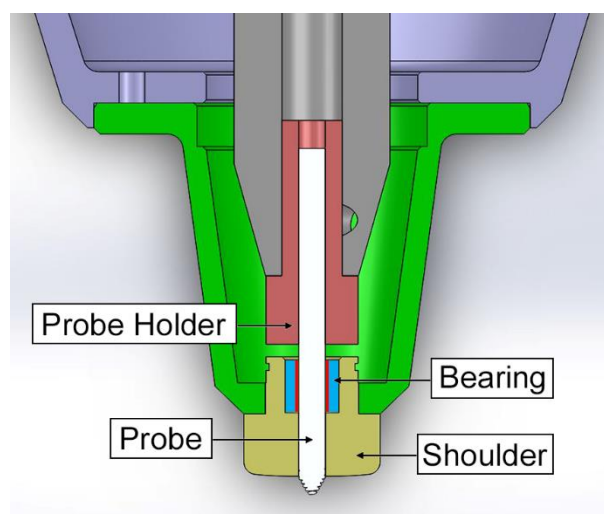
Schematic drawing of the previous SSFSW tool system
